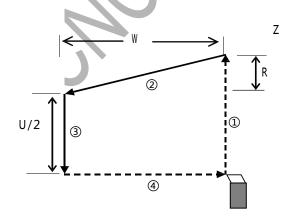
Offset direction of tool nose radius compensation in G90
